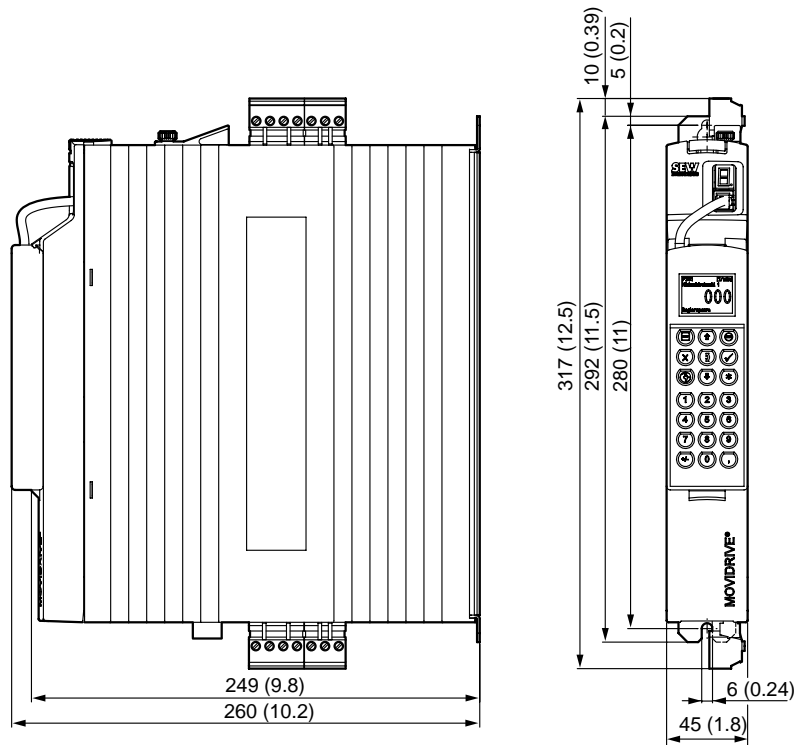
Dimensions for MDX60B size 0S, dimensions in mm (in)
